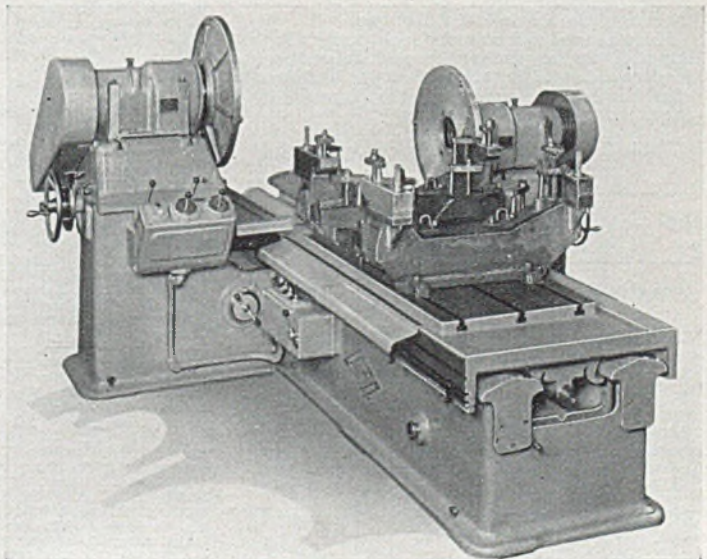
(right).—Lund Duplex fine-milling machine. The two light-alloy cutter heads carry three diamond tools at a 28-in. diameter circle.
